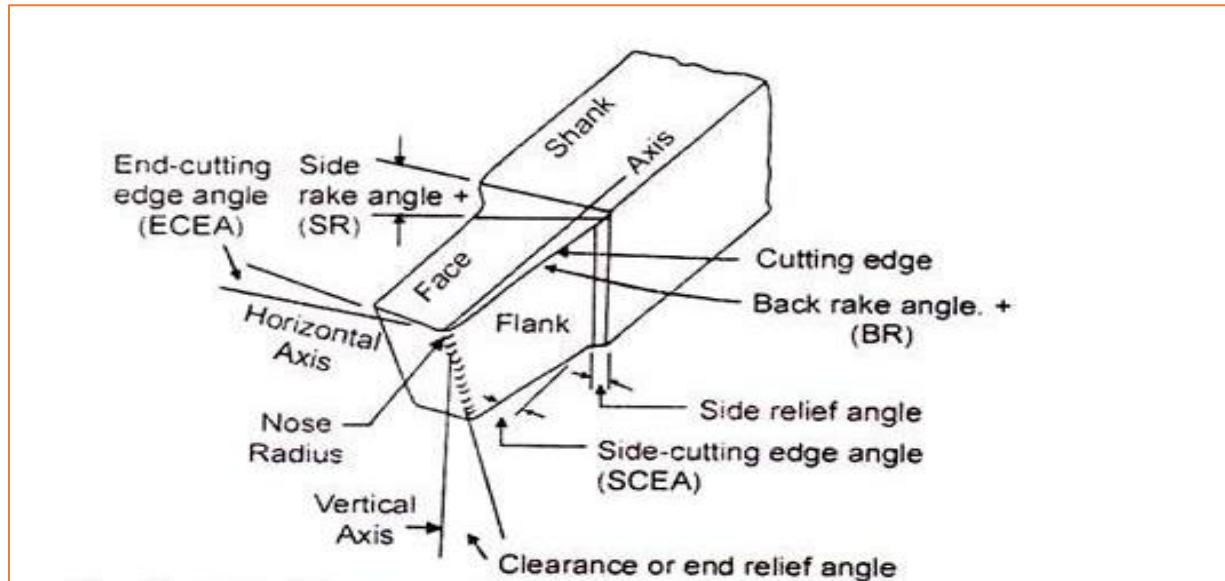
8: Tool Geometry of Single Point Cutting Tool [60]
